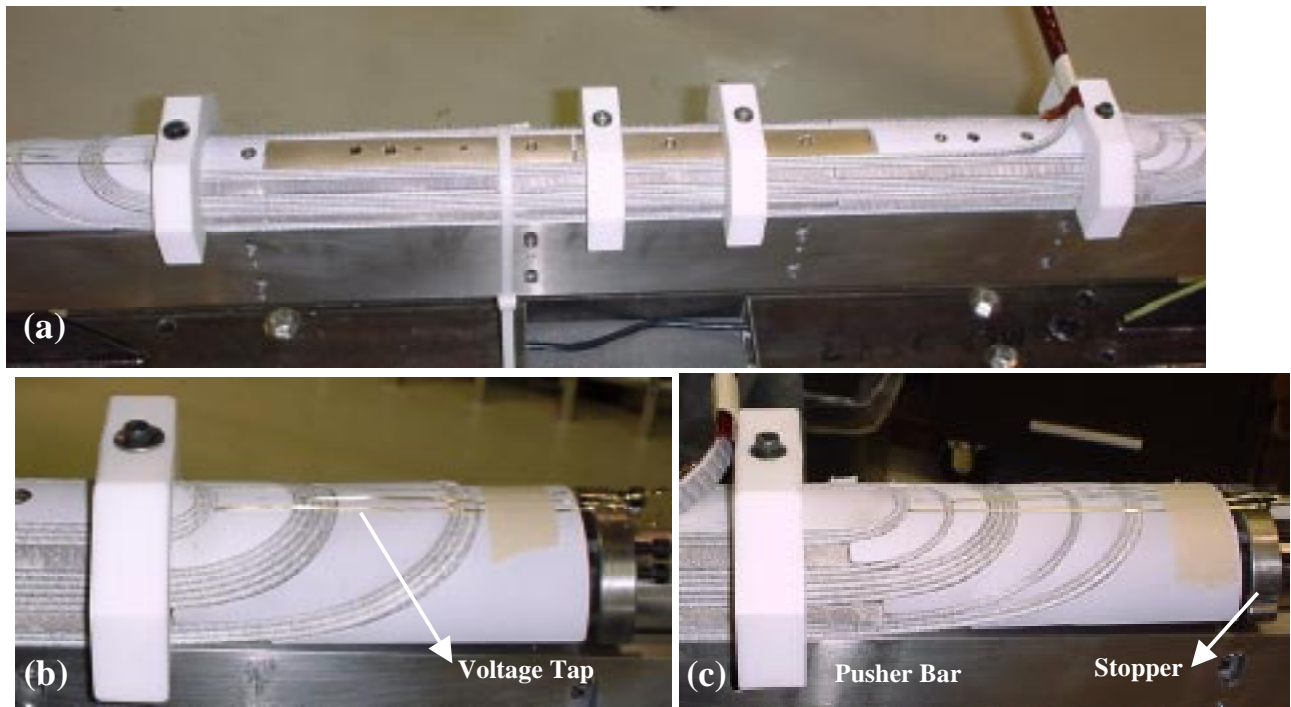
First inner coil after winding (a) overall coil (b) RE (c) LE.
